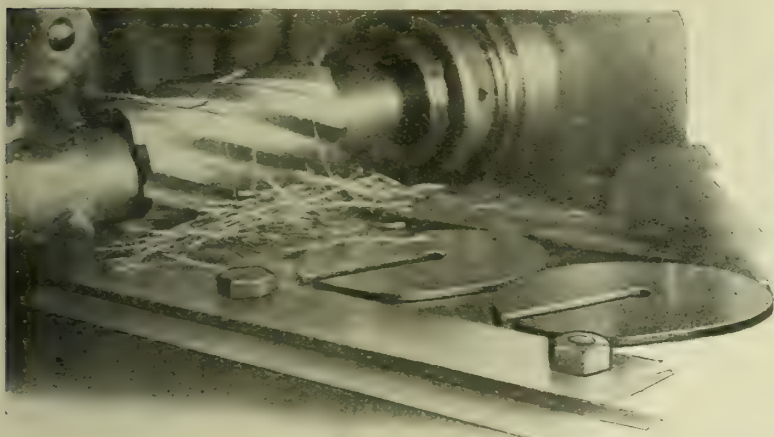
A Magnetic Chuck used holding thin plates in a Milling Machine.
